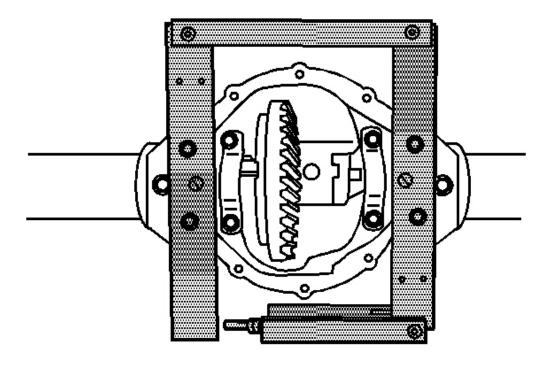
Installing J 45222 Onto Axle Housing Courtesy of GENERAL MOTORS CORP.
